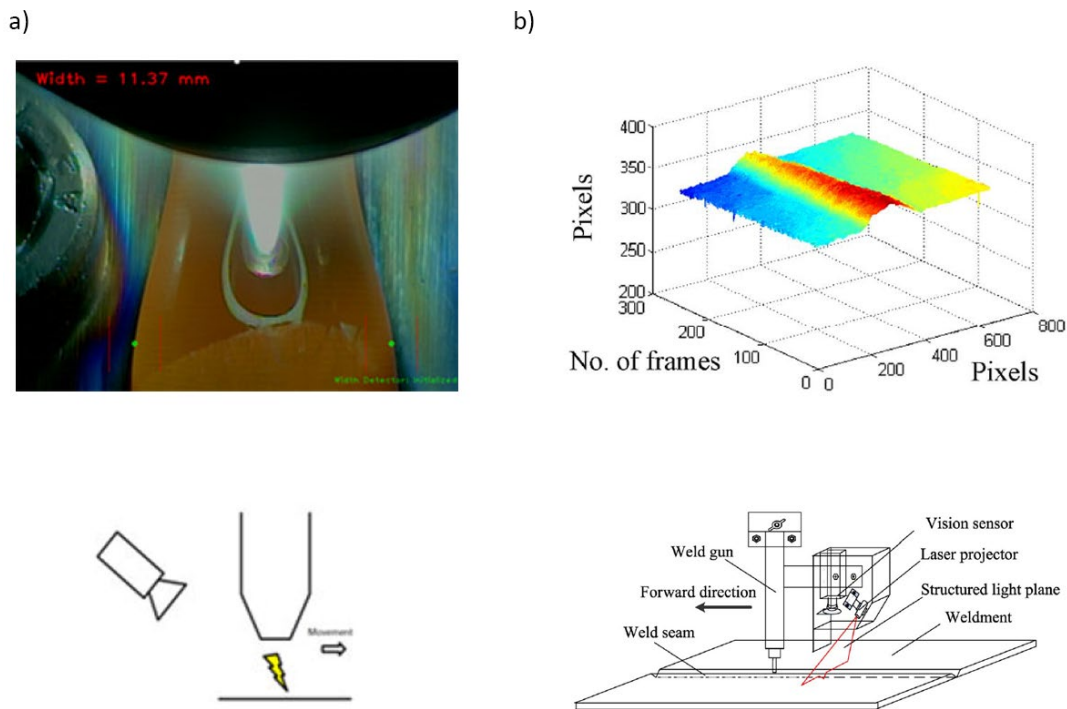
a) Passive optical measurement of weld bead width; b) active optical measurement of weld bead profile.
